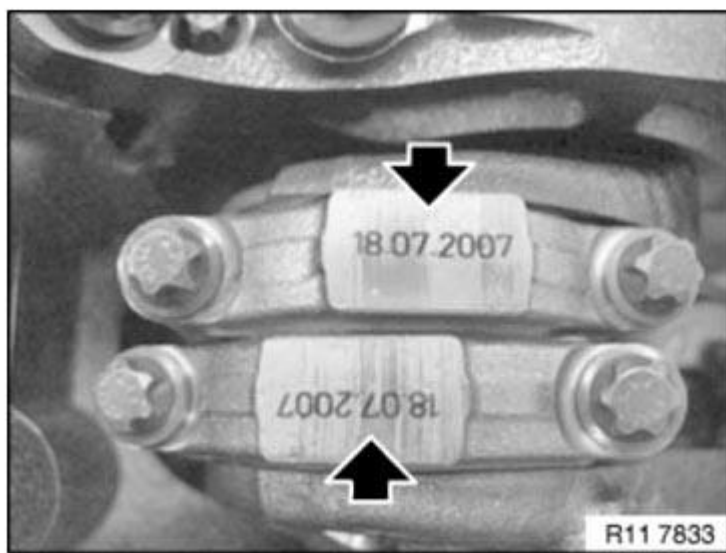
Locating Connecting Rod Bearing Caps Stamped Dates
